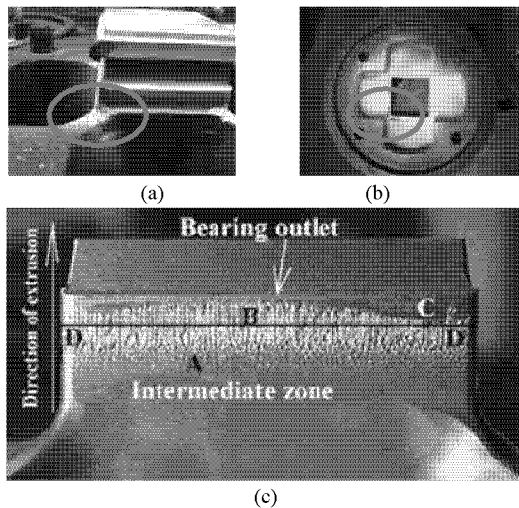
Example of die failure in porthole die, (a) and (b) Crack failure, (c) wear failure, [1]
